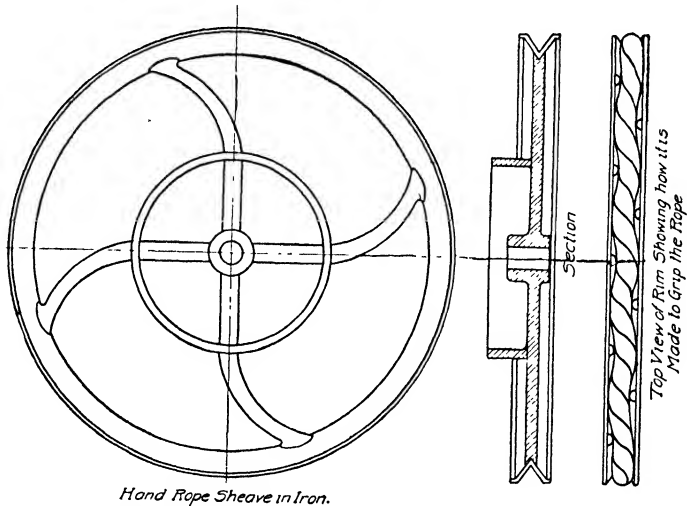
Elevation, Plan, and Section of Rope Wheel with Ridges Cast in Score
